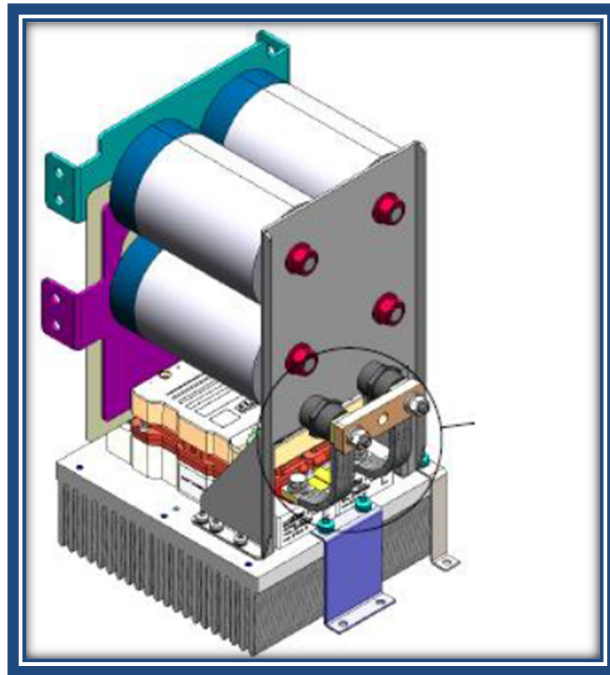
One IGBT leg of SKiiP1013 assembly including gate driver, heatsink and bus dc sensor
